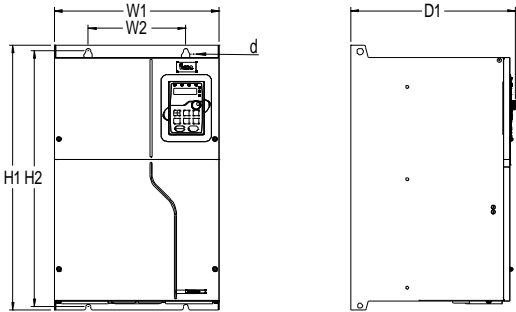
Wall mounting for VFDs in T8–T9 frames
